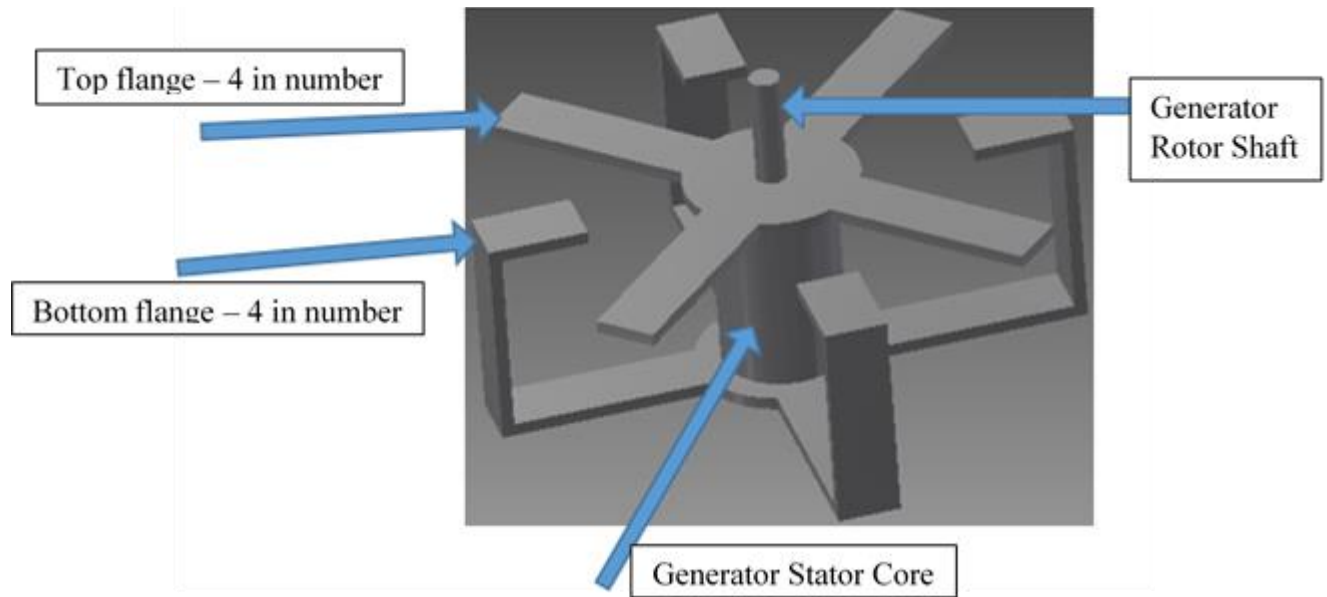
Stator of the generator showing the flanges and shaft for the adjustable height rotor
